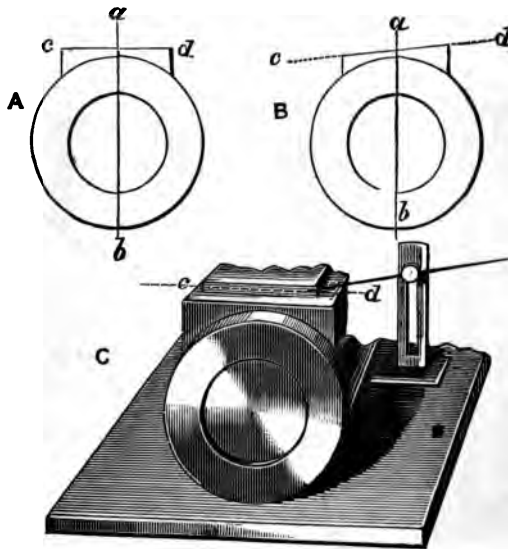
SLIDE VALVE—METHOD OF CUTTING THE STEAM HOLES IN THE CYLINDER.
